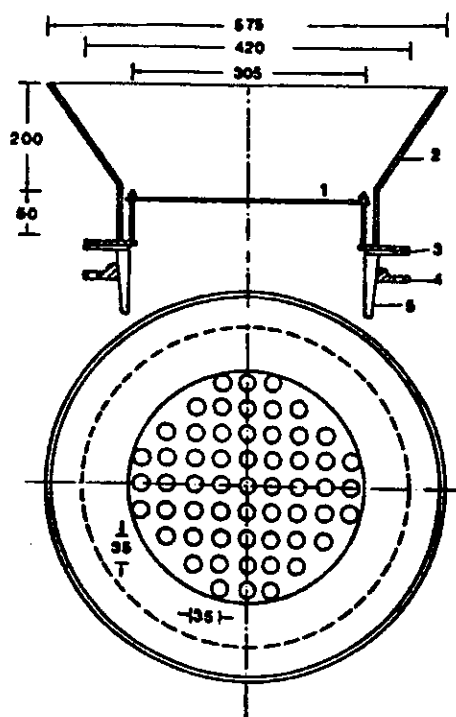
Design details of the diverger section at the top end of the 30.5 cm diameter slurry bubble column. (1) stainless steel perforated plate, (2) diverger section (3) gaskets, (4) flange, and (5) glass column. All dimensions are in mm.
